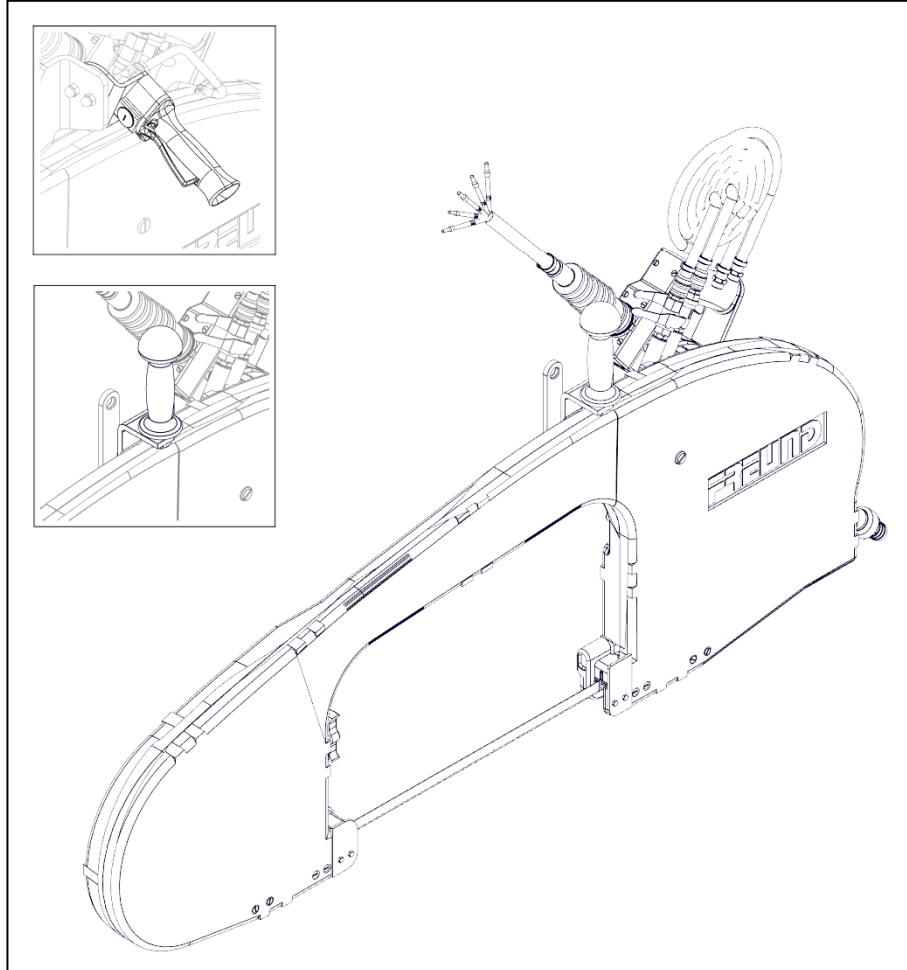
View of standard machine SB50-08 with detailed view of handle
